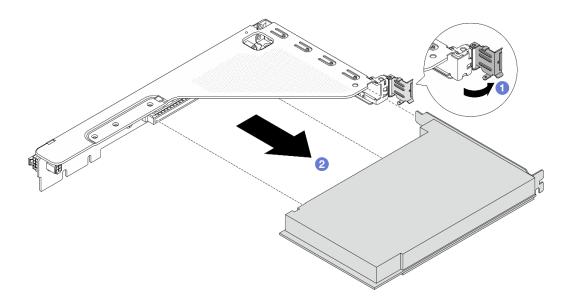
Removing a PCIe adapter from the 1FH riser cage
